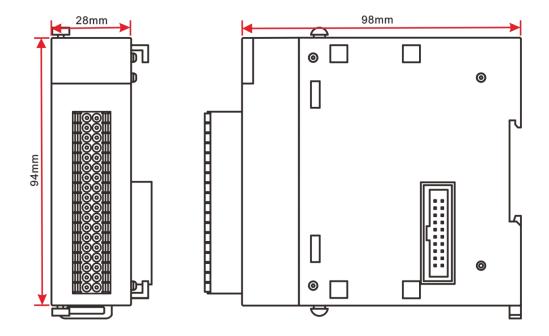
TK6-8HAI-B external dimensional drawing (unit: mm)
